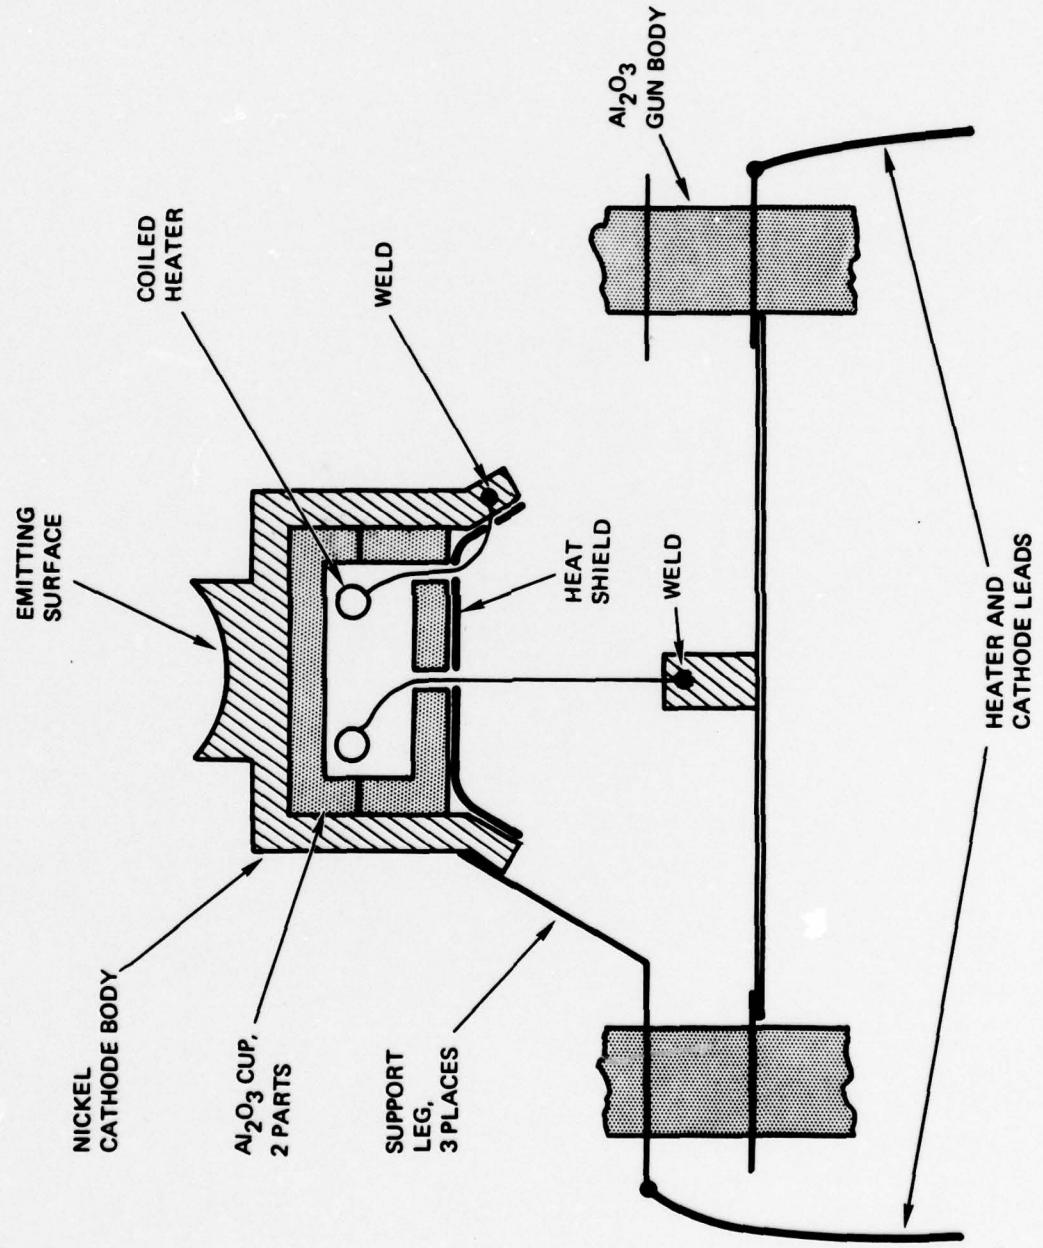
Cross-Section of Heater-Cathode Assembly. (The critical part of the assembly is the point where the heater lead passes through the aluminum heat shield.)
